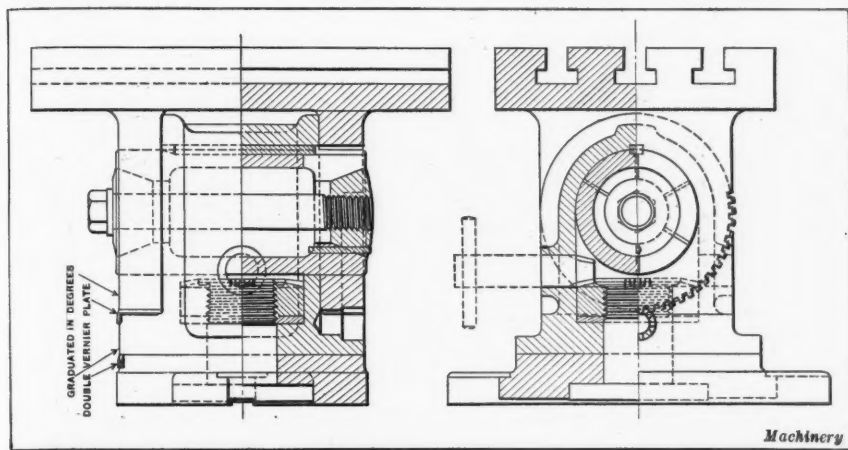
Features of Design of Beckett Universal Angle Fixture shown in Fig. 4
